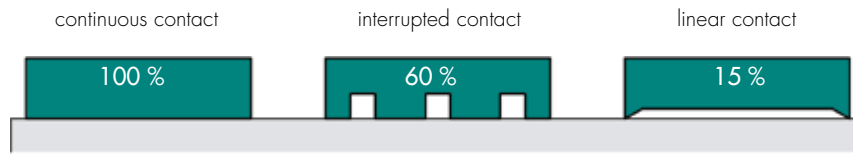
Rough illustration of holding force reduced by unfavourable workpiece shapes
